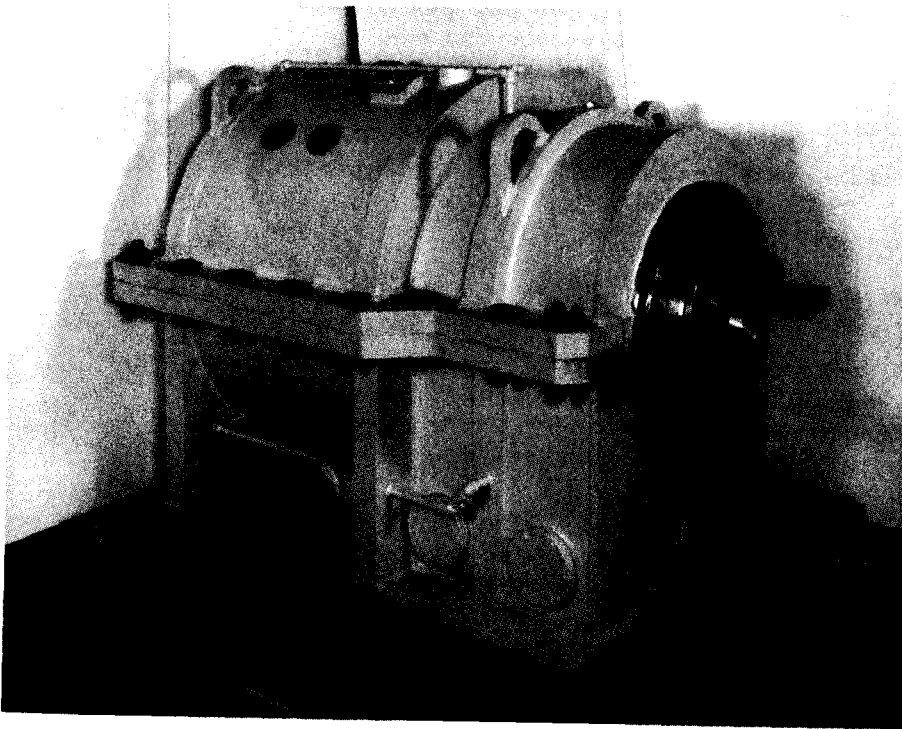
Combined 43.5" thrust and 20" journal bearing for DDG.
